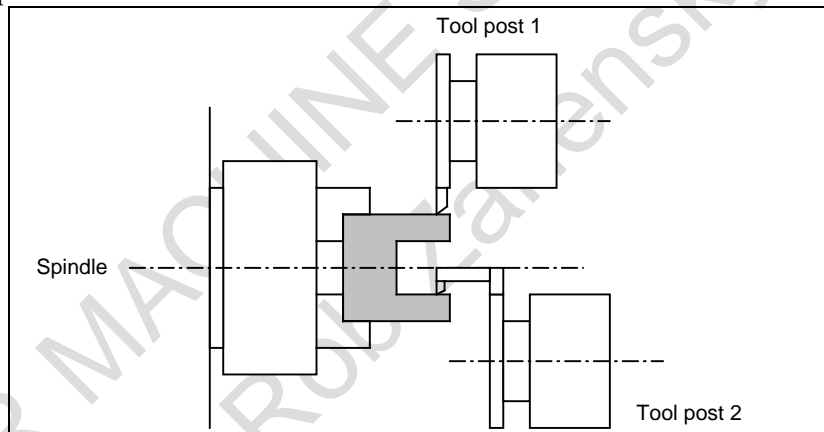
(a) Application to a lathe with one spindle and two tool posts
